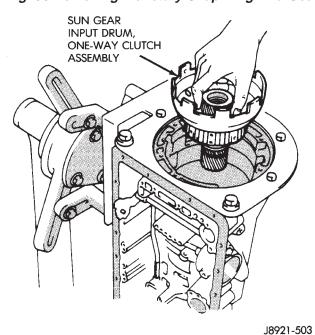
Removing Sun Gear, Input Drum And One-Way Clutch
